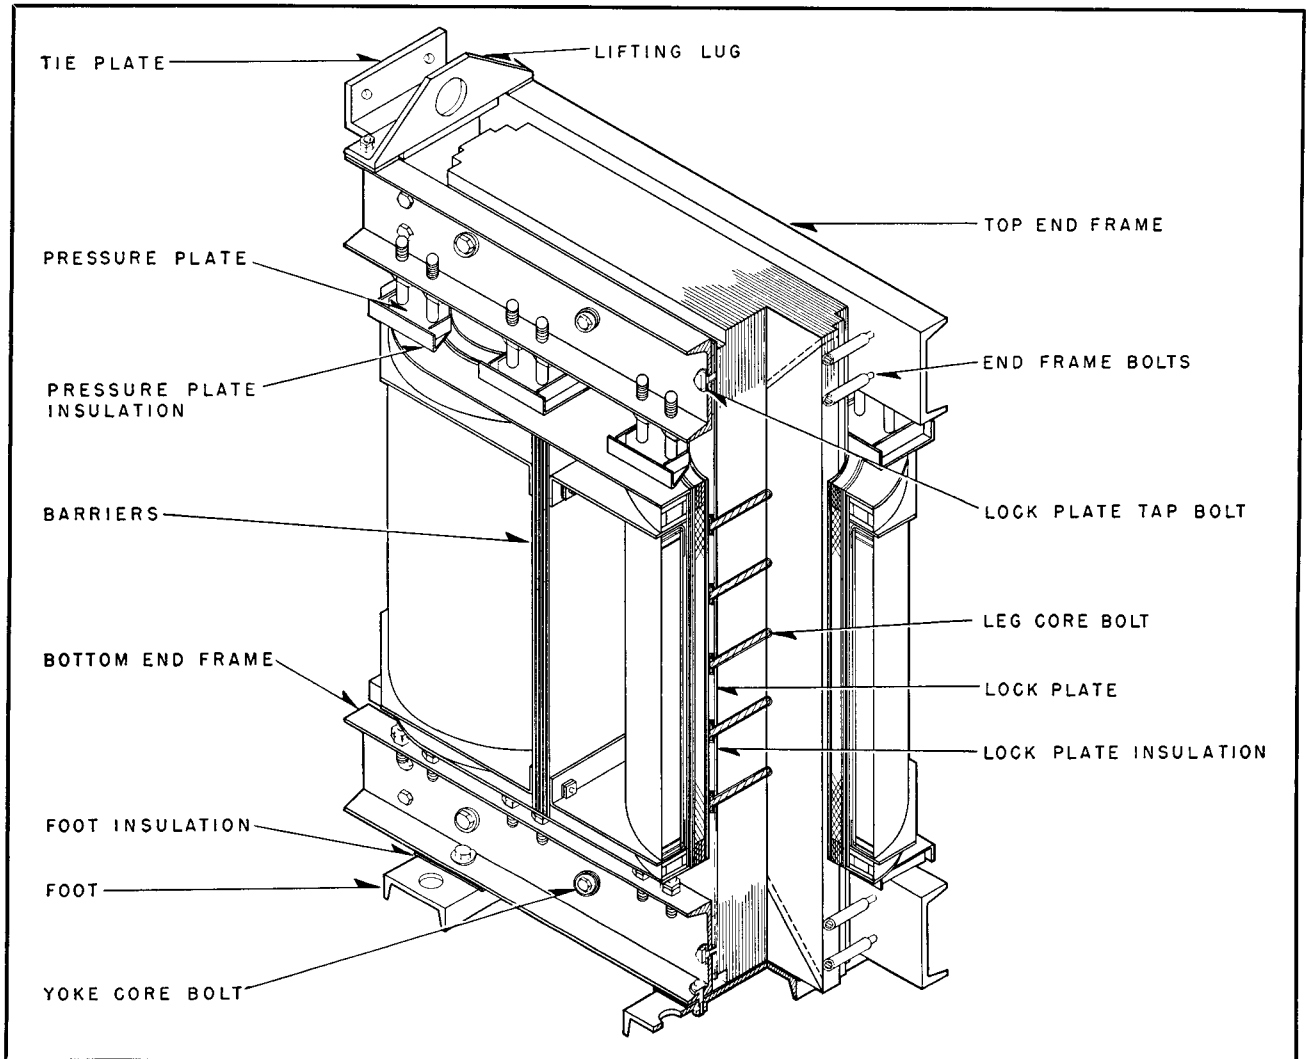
Sectional View of a Single-Phase Core Form Transformer.
